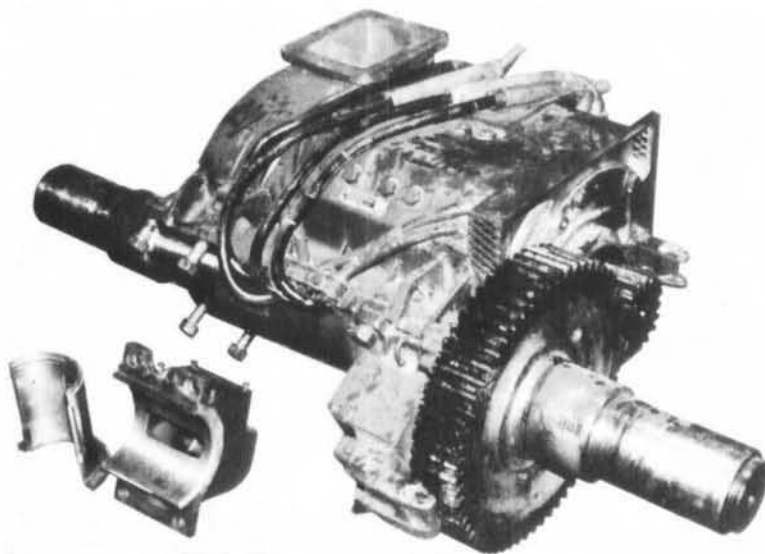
EMD D79 railroad traction motor with reduction gearing.
